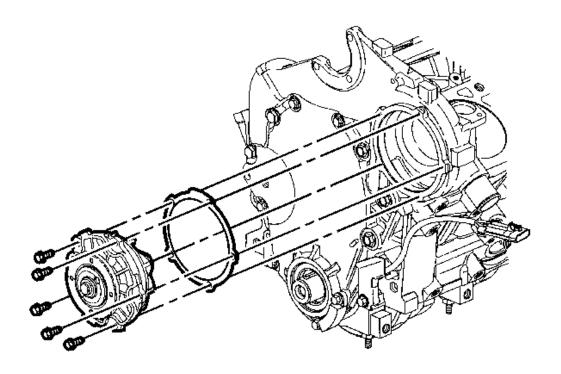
View Of Water Pump Assembly & Bolts Courtesy of GENERAL MOTORS CORP.
